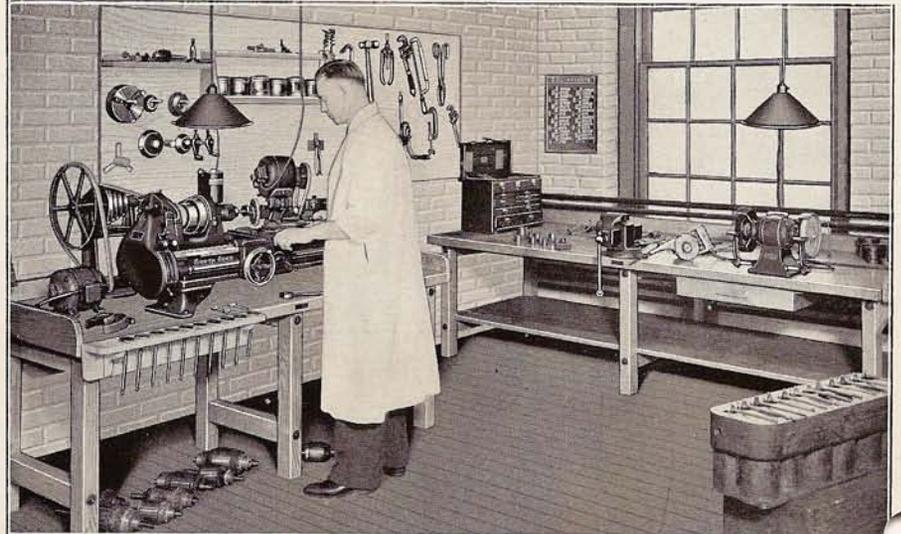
The No. 9 Auto Service Shop Equipped with Lathe and Equipment for Servicing Armatures, Valves, Pistons, Bushings, Connecting Rods, etc.
